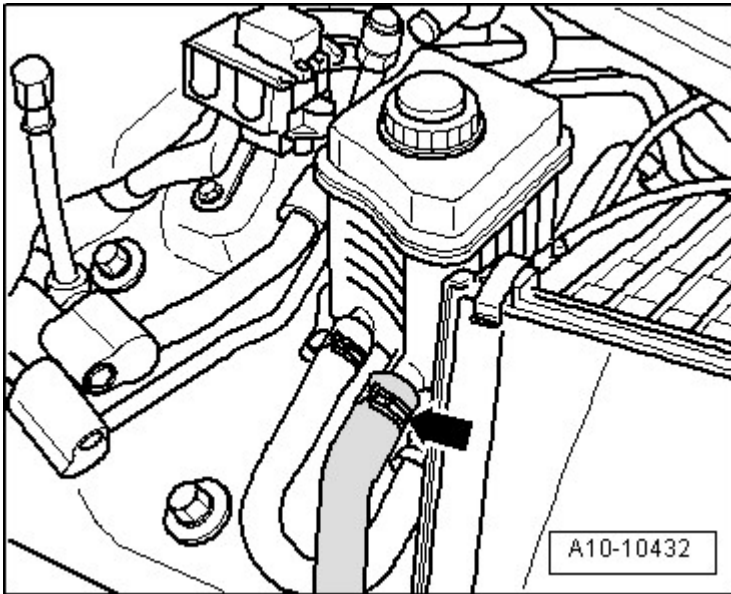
Identifying Hose For Power Steering Fluid Reservoir
